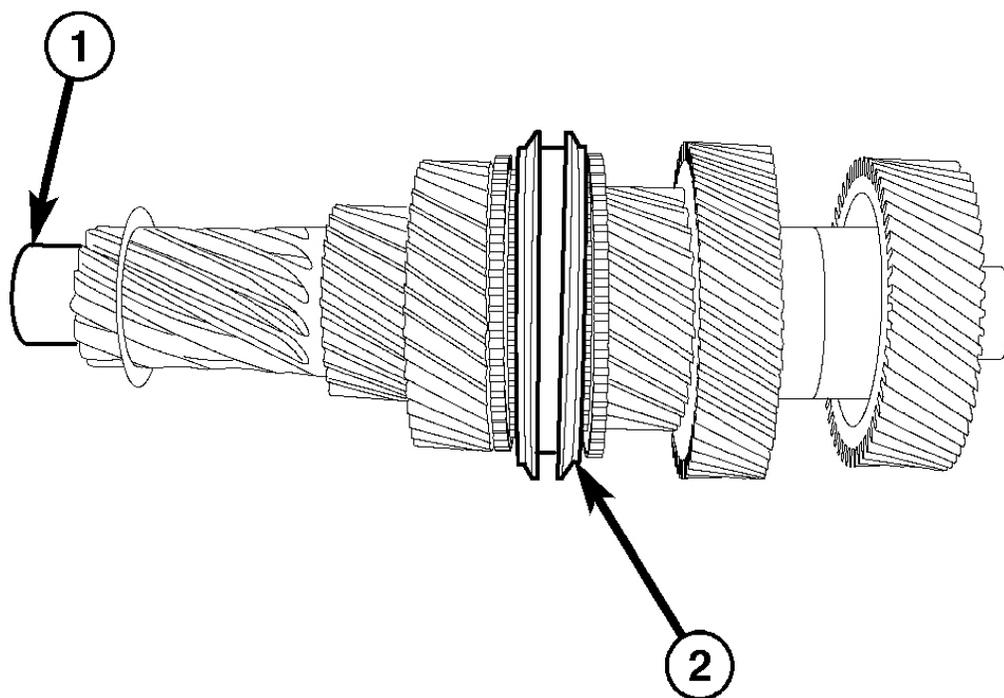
Identifying 1-2 Synchronizer Hub & Second Gear
